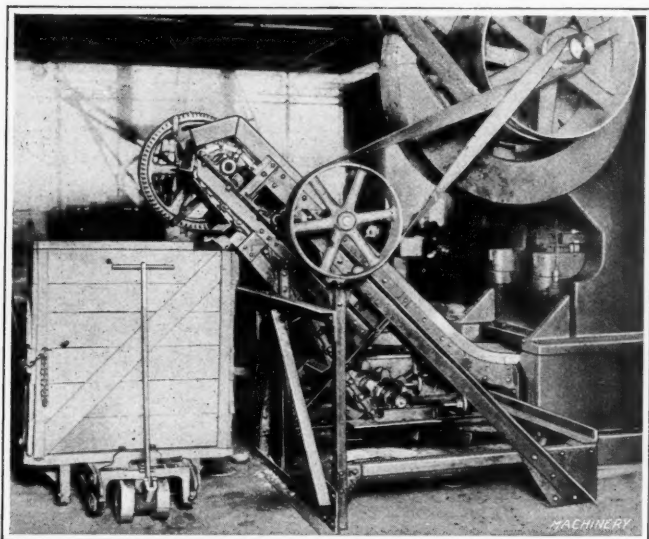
Chain Belt Conveyor for transferring Product of Power Press to a Truck
